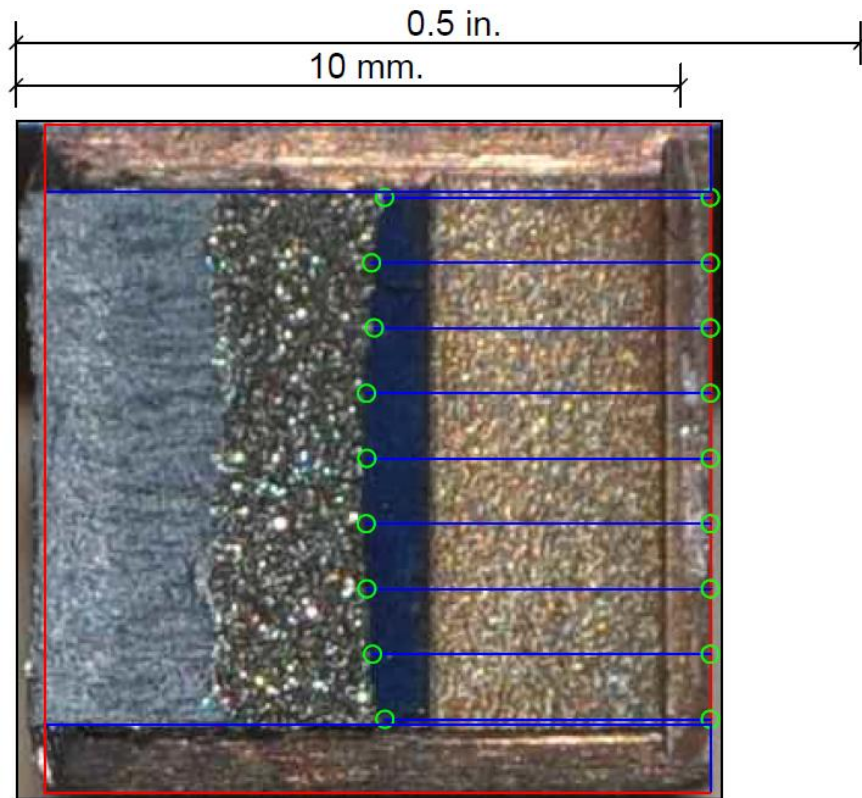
Specimen M8' Fracture Surface
